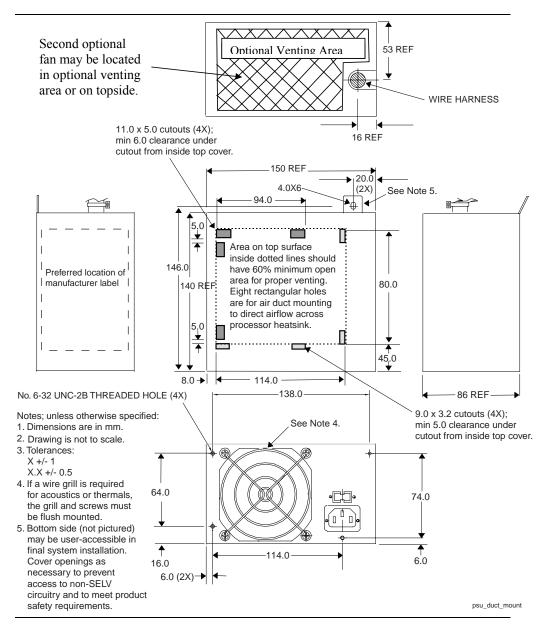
Power Supply Dimensions for Chassis That Require Top Venting
